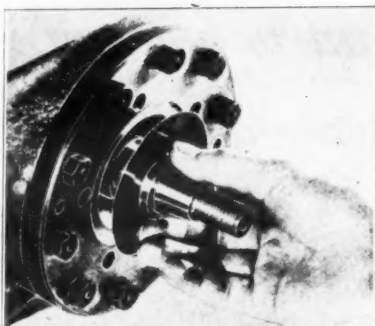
Shaft seal with flat diaphragm being removed from compressor.
